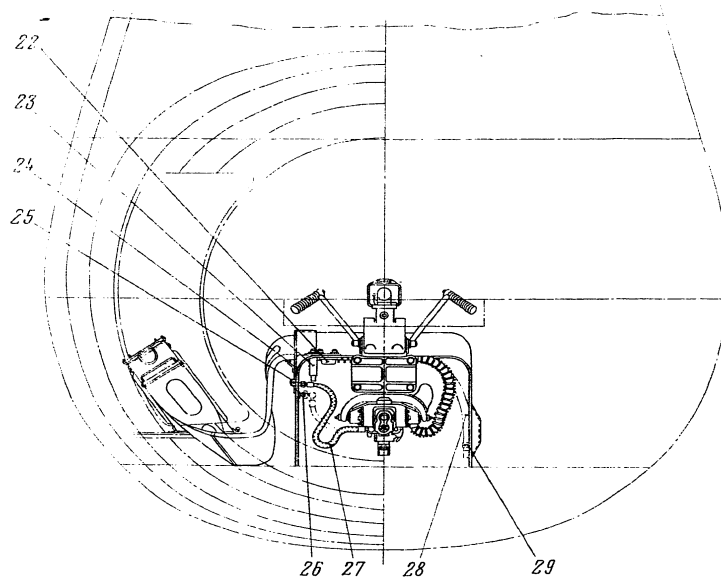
Installation Diagram of Machine Gun Mount (front view)
